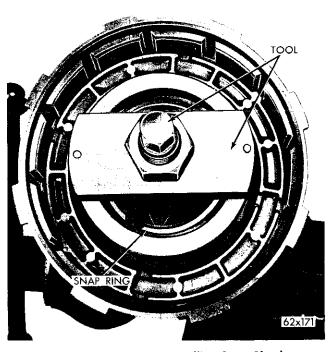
Removing or Installing Front Clutch Spring Retainer Snap Ring
